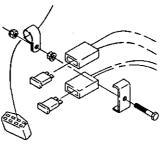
Loom Clamp Attachment (17 & 18 hp)
